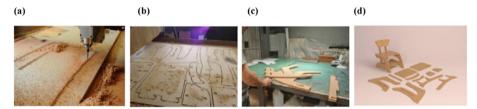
Process of prototyping: (a) CNC Cutting Machine cutting the samples, (b) The MDF board image after the cutting from the CNC Machine, (c) assembling of all the pieces the prototype, (d) a view of the furniture before assembly and after the assembly Source: Authors
